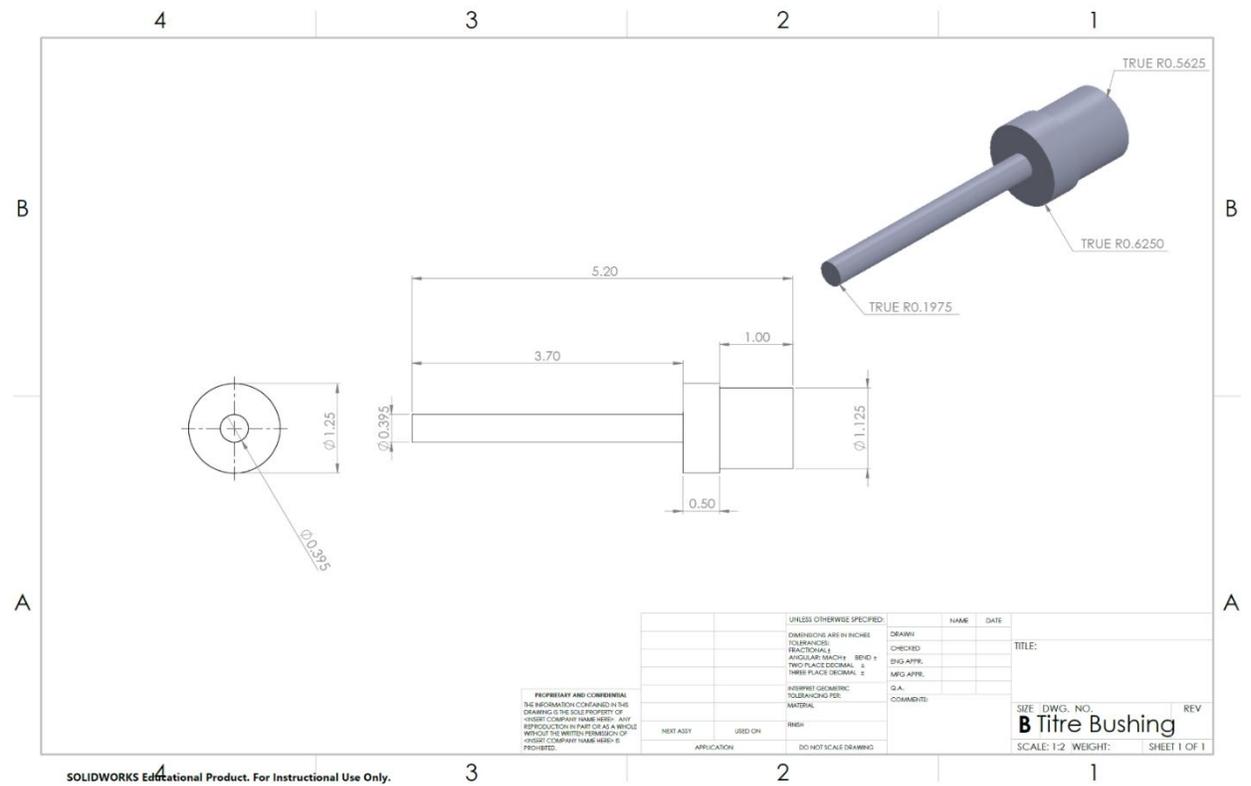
Rear Axle Tire Bushing SolidWorks Drawing
